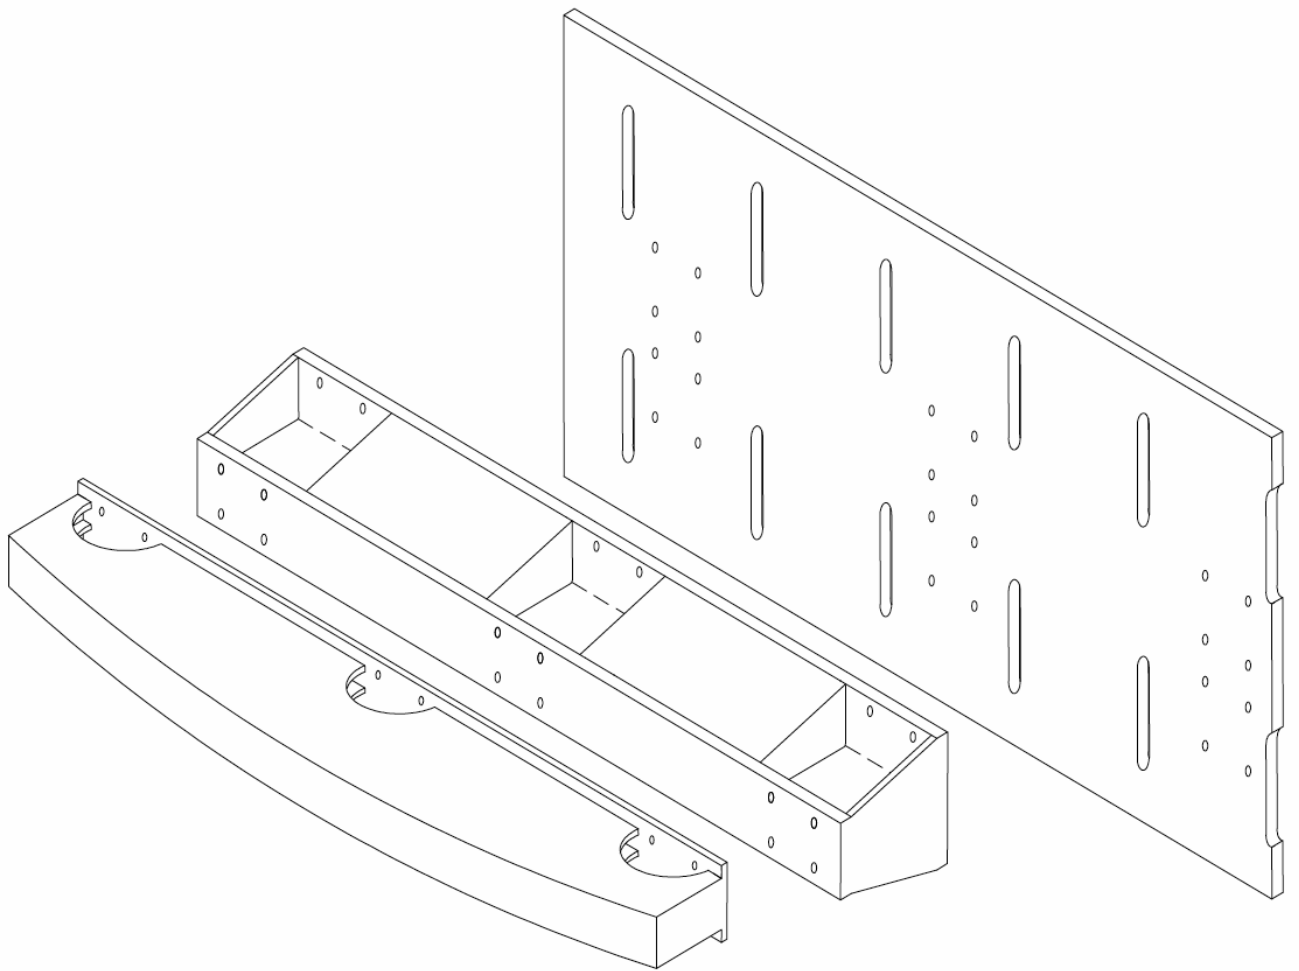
Steel Barrier Layout (without backstop) (IIHS)
